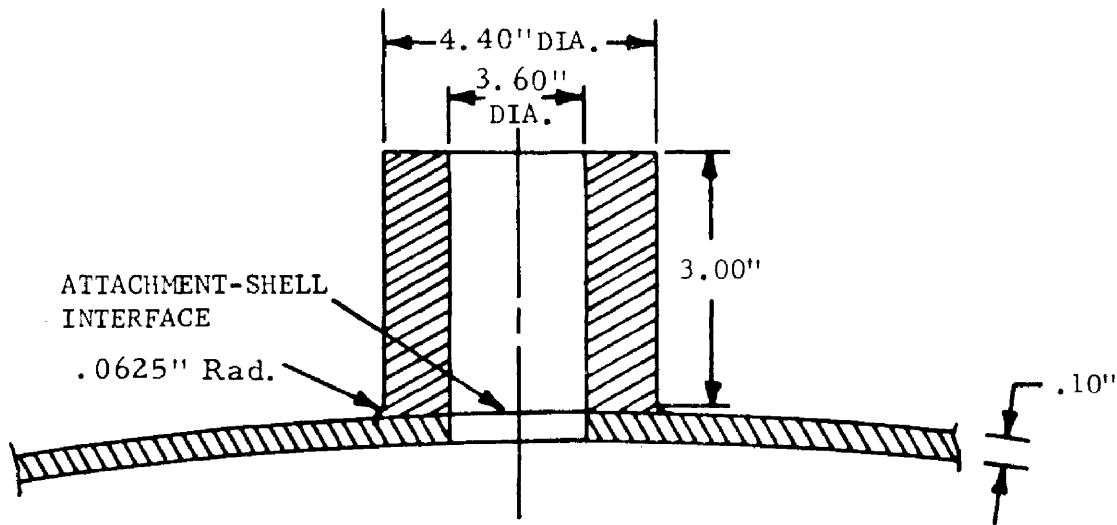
Welded Hollow Attachment (Detail A)
